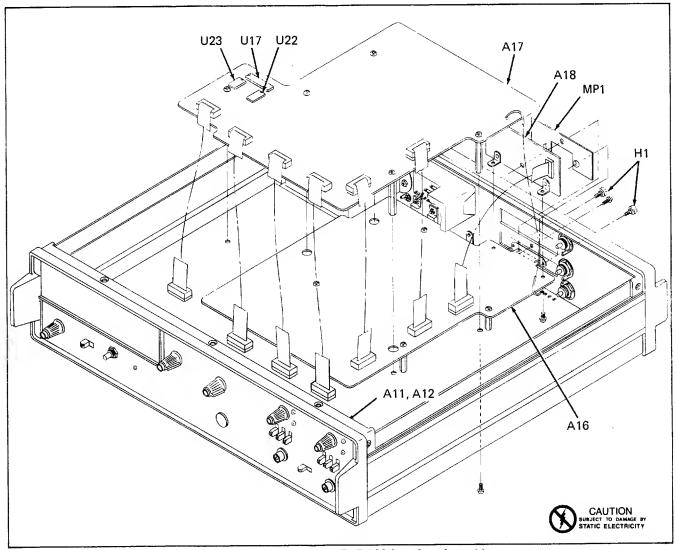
15 Option, IEEE-488 Interface Assembly
